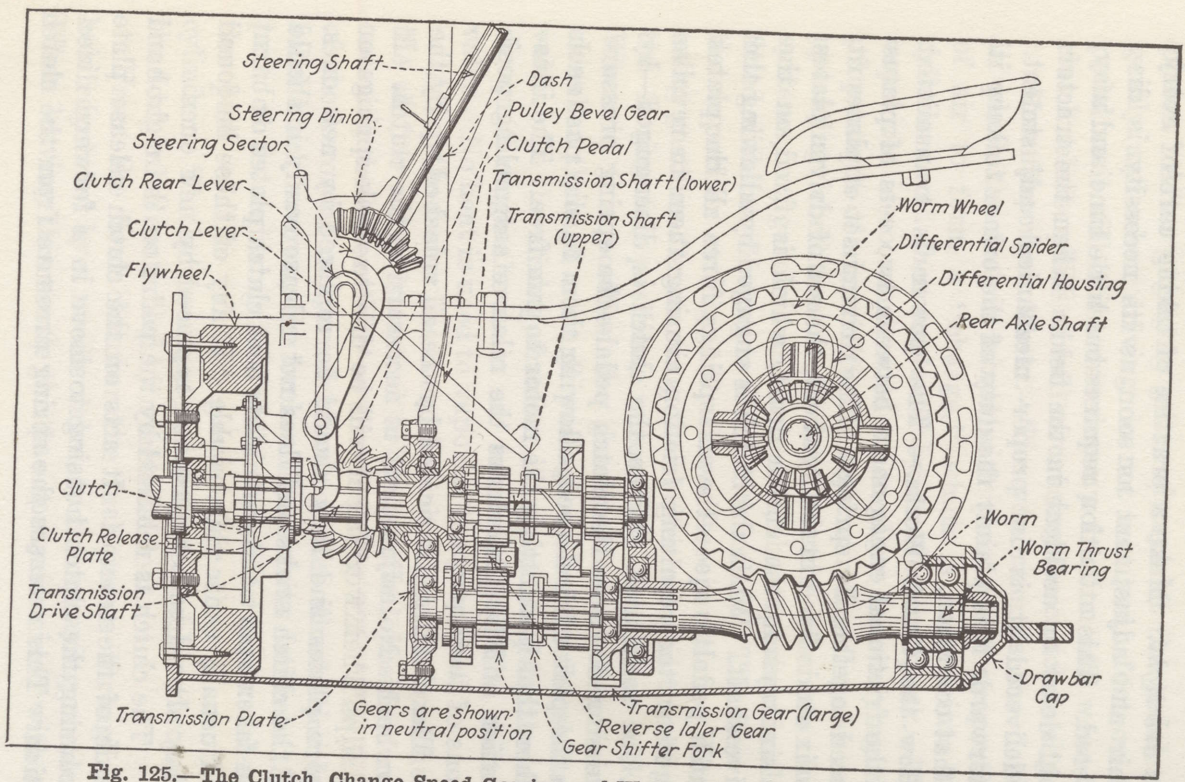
The Clutch, Change Speed Gearing and Worm Drive Gearing of the Fordson Tractor.
